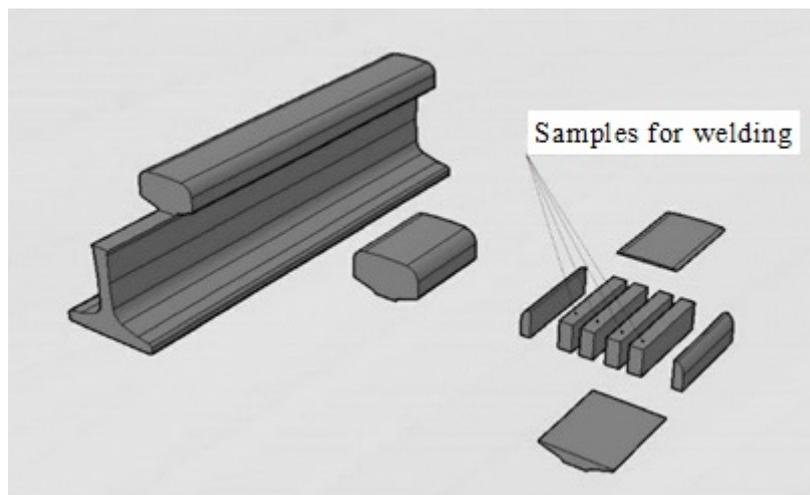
Layout of cutting samples with sizes 90 mm × 30 mm × 10 mm.
